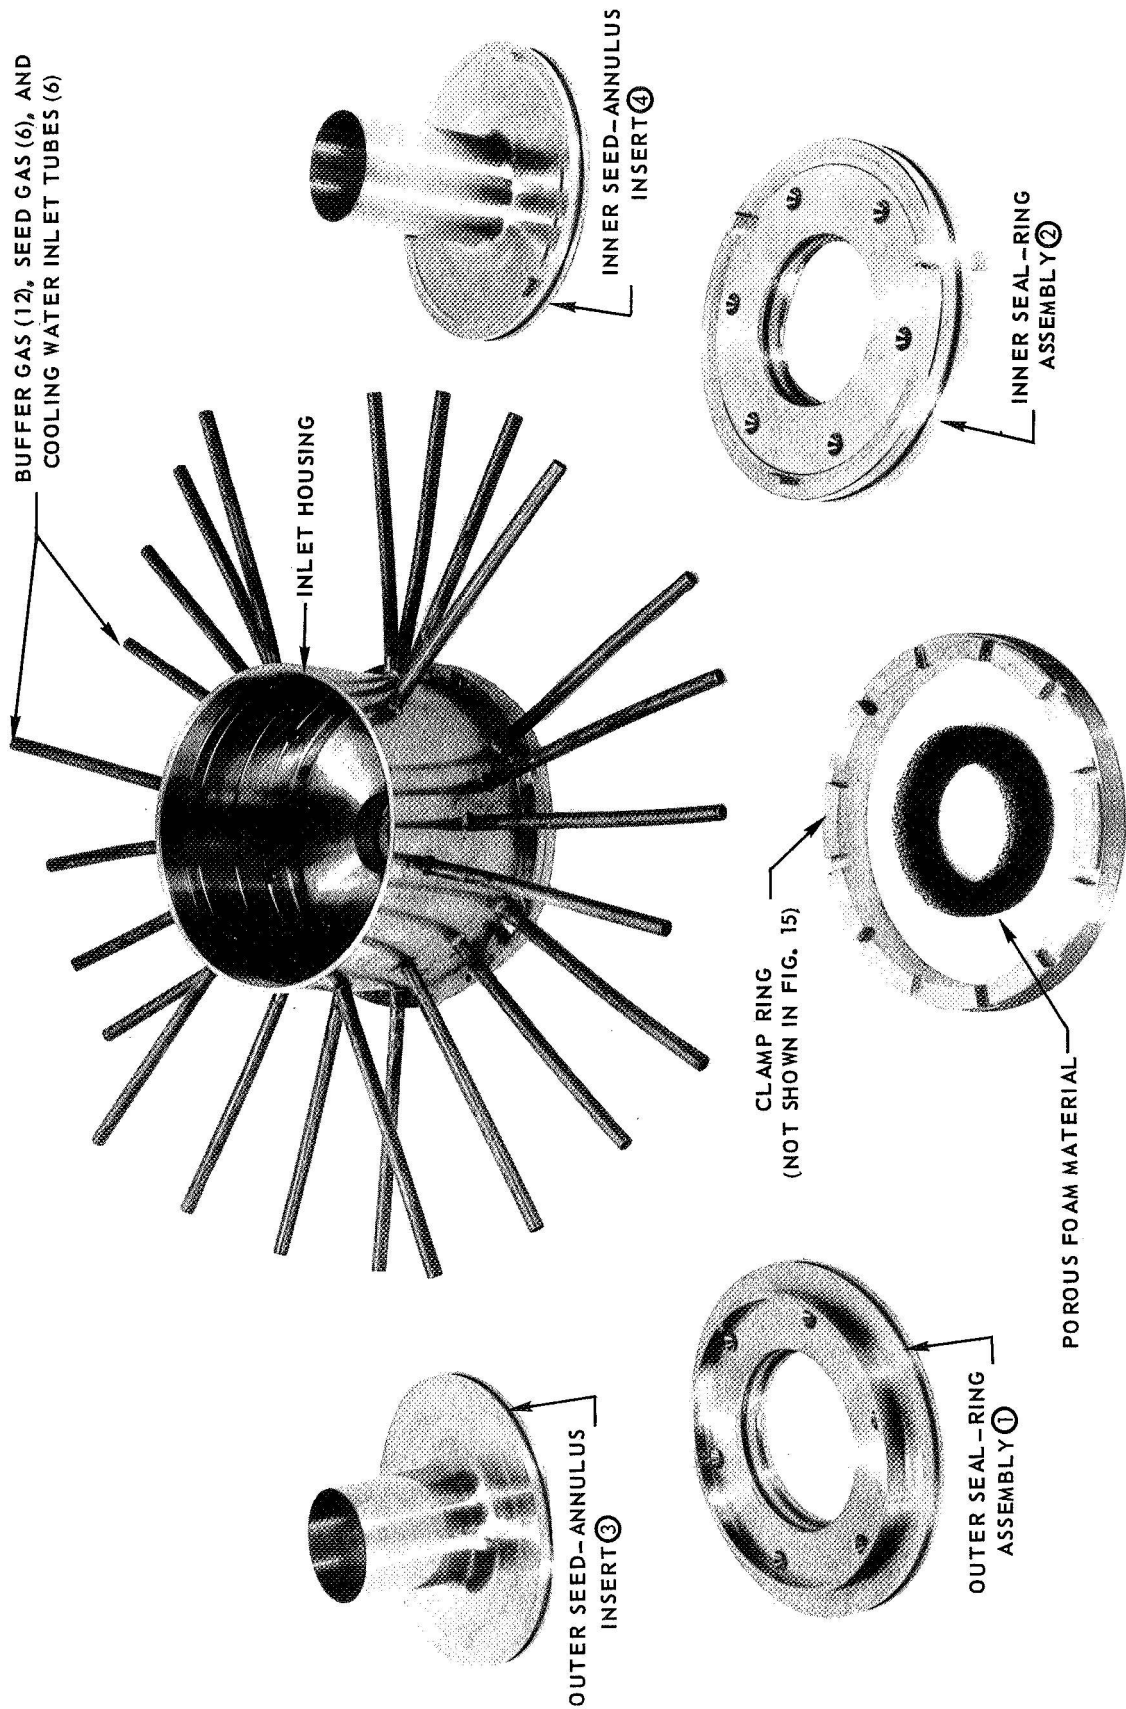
DETAILS OF INLET GEOMETRY USED IN PROPELLANT HEATING TESTS
